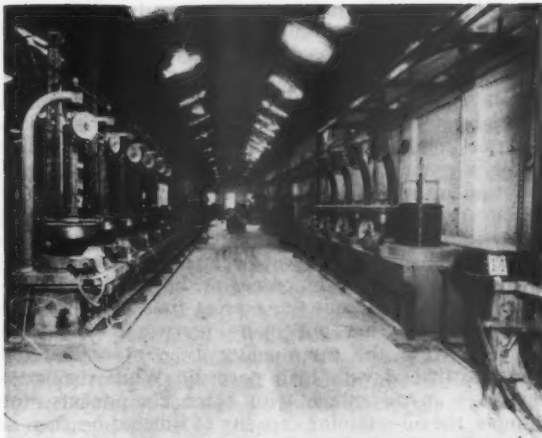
High-speed, non-stop drawing machines handling steel wire and having finishing speeds up to 2000 fpm
